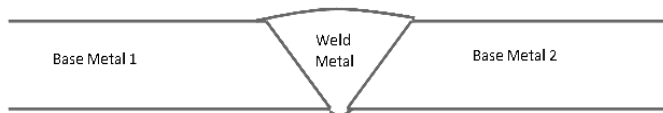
Schematic picture of a dissimilar metal weld
